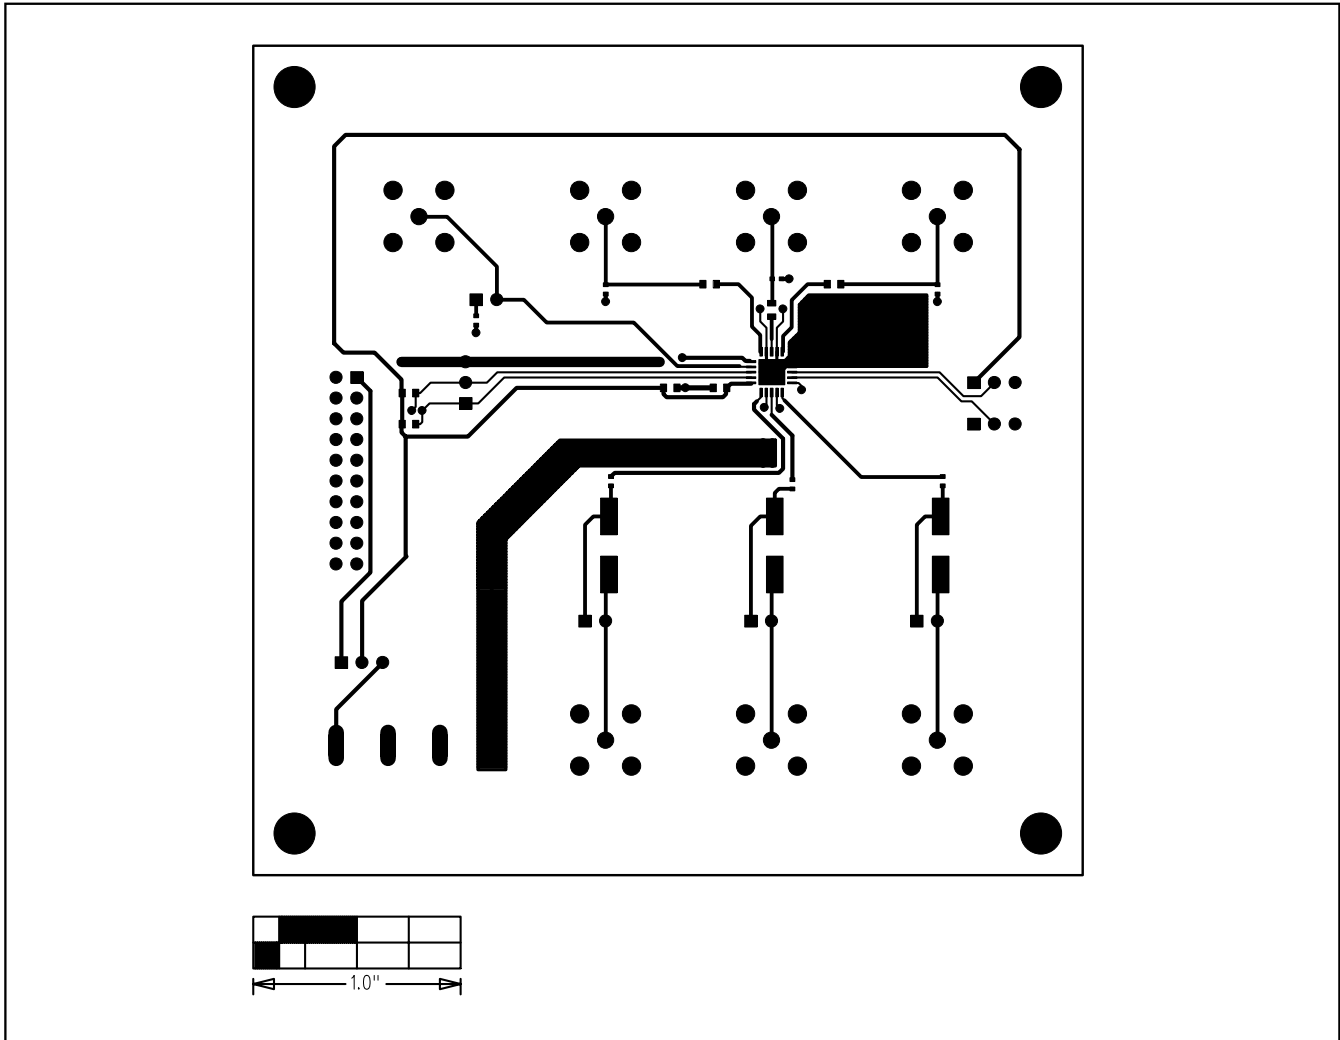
MAX7470 EV Kit PC Board Layout—Component Side
